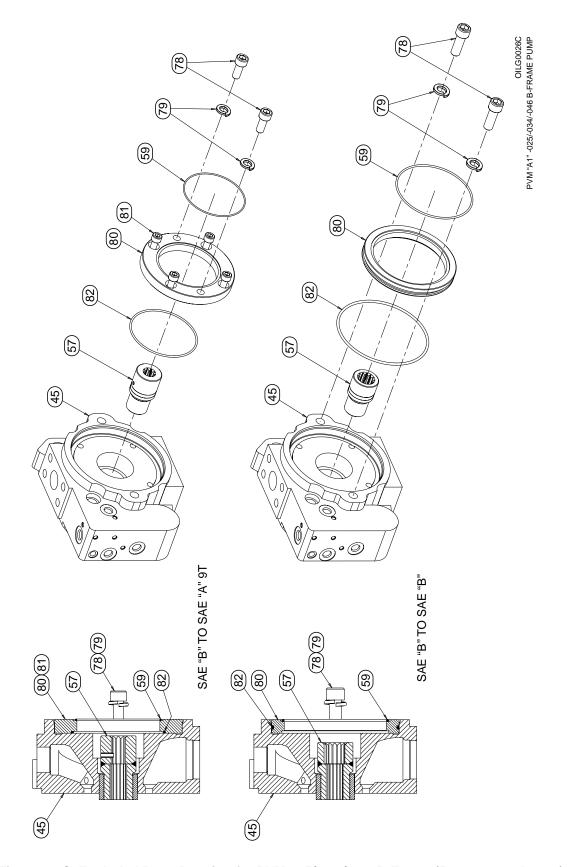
C. Exploded Parts Drawing for PVM-025/-034/-046 B-Frame (519272-201 sheet 3)
